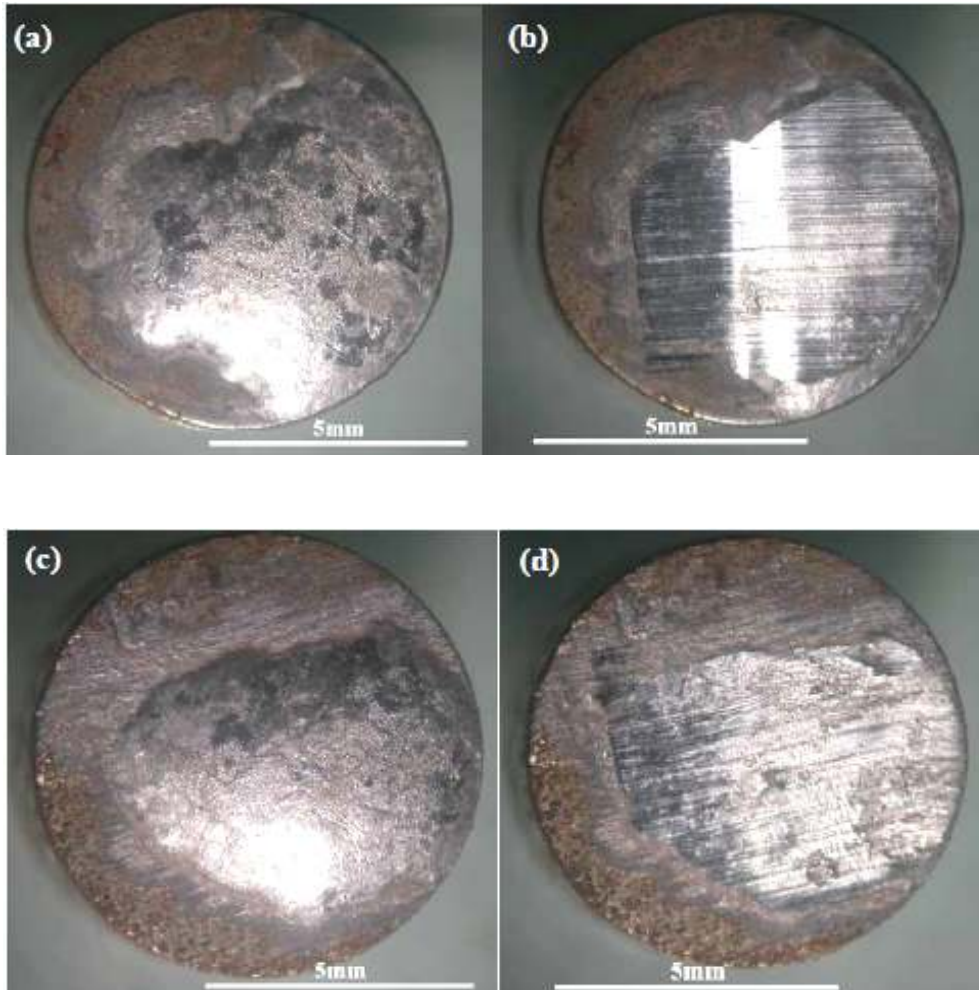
Macroscopic images (top view) of stabilized Sn-2.5Ag-0.5Cu solder on (a) smooth Fe-Ni surface (c) rough Fe-Ni surface. Macroscopic images (top view) of sheared Sn-2.5Ag-0.5Cu solder on (b) smooth Fe-Ni surface (d) rough Fe-Ni surface
